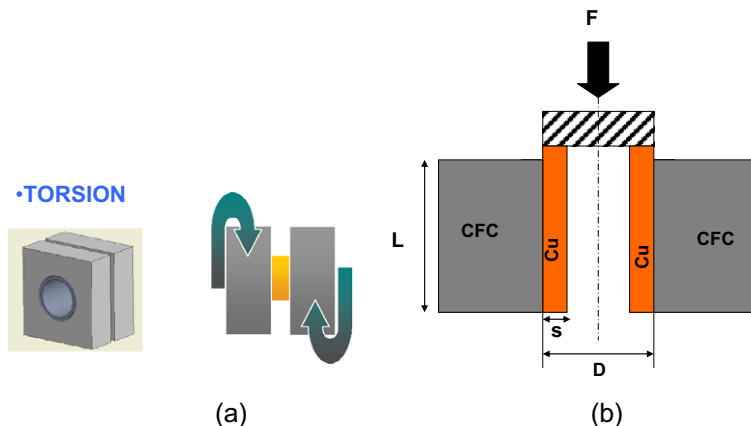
Drawing of tested sample and proposed shear tests for CFC/Cu samples joined in the monoblock configuration: torsion (a) and shear by compression (b) tests. In (b) F = compression load, D = Cu tube external diameter, s = Cu tube thickness and L = CFC thickness.
